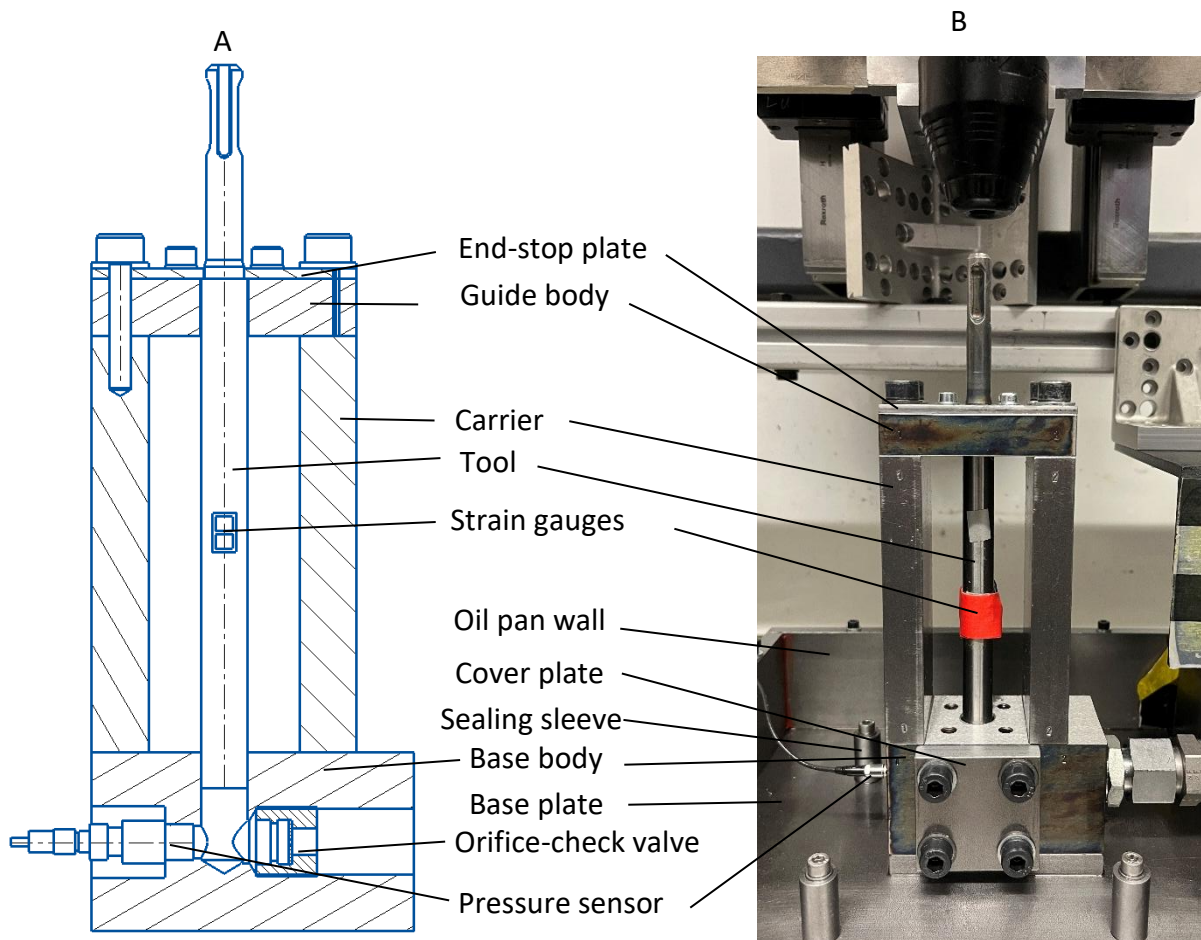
Hydraulic substitute base for rotary hammers: (A) sectional drawing, (B) photograph
